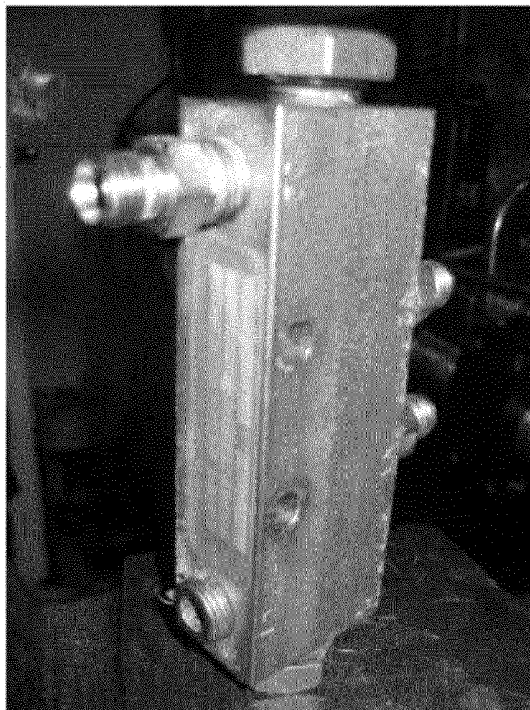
shows the suspected leaking POCV removed from the auto shear hydraulic circuit. This valve will be replaced.
